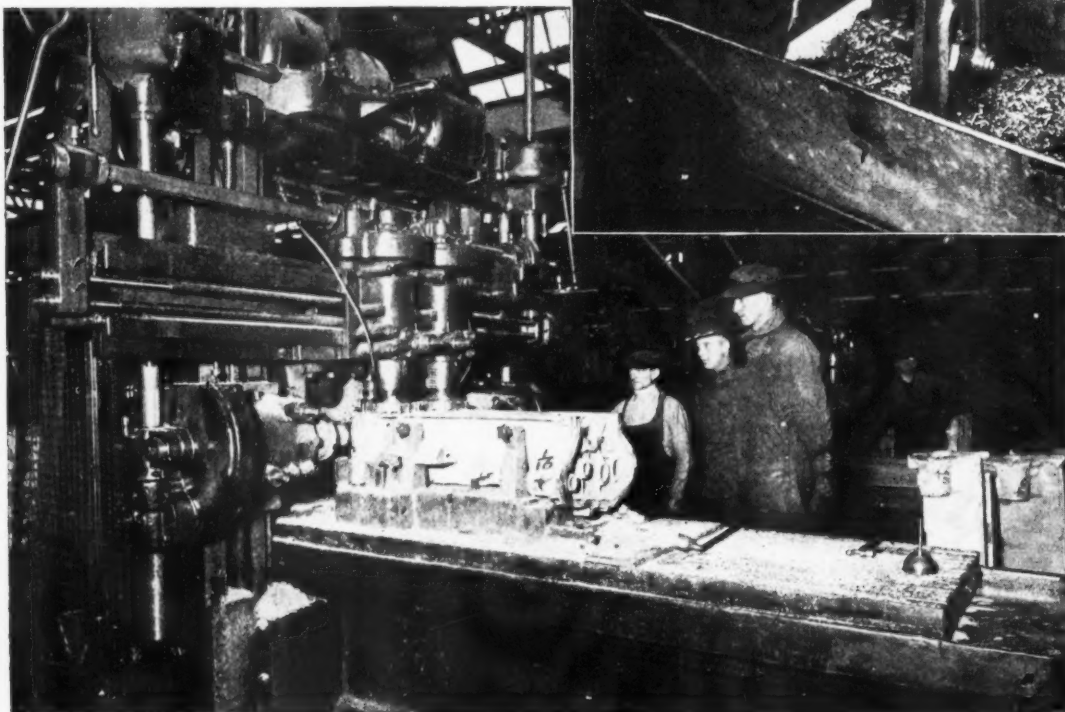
Machining operation on aluminum crankcase. Six surfaces are being machined at one time
